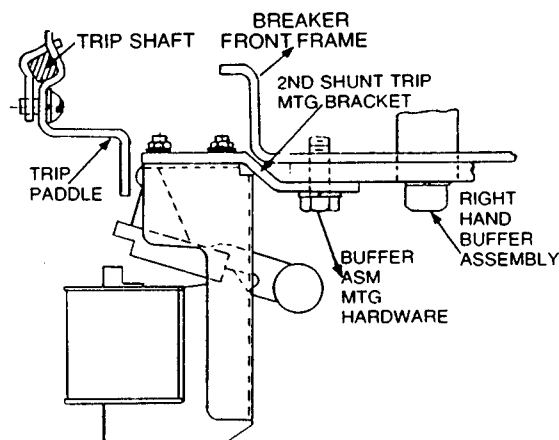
2ND SHUNT TRIP INSTALLATION
